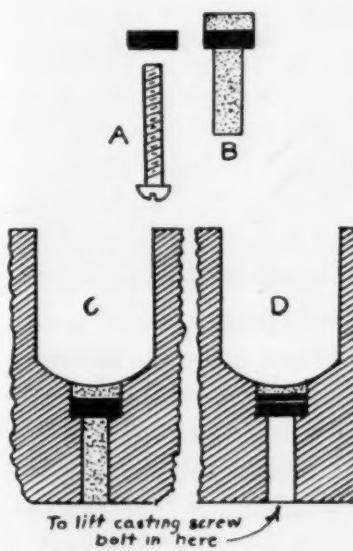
A—the bolt and nut; B—the nut with plasticine cores; C—the jack assembly cast into the mold; D—plasticine cores removed, pressure plate added above nut, and plasticine filling added above pressure plate; mold ready to pour casting.
